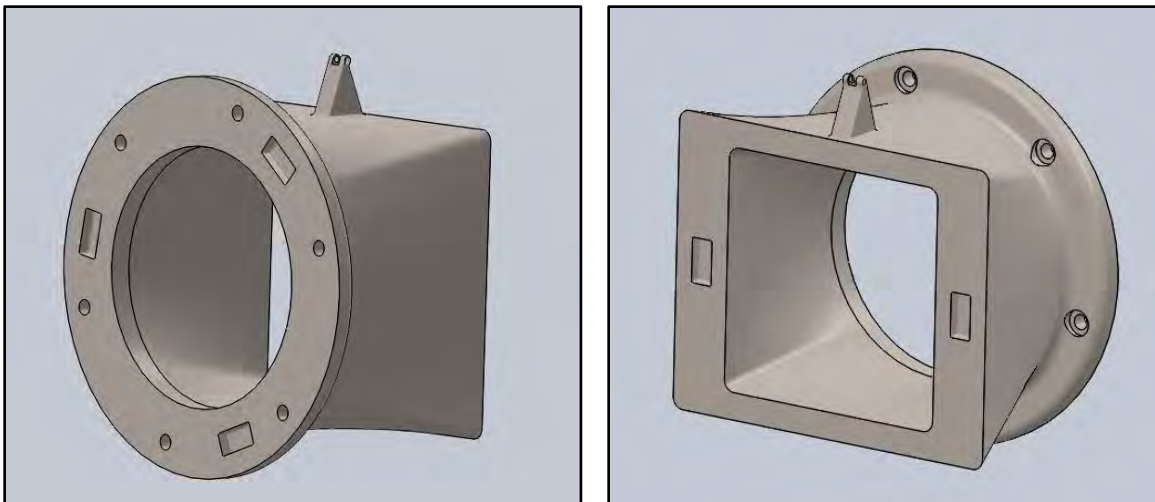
The converging section as seen from the side that attaches to the mounting flange (left) and the side that connects to the diverging section (right).
